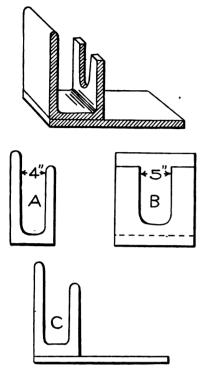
TOOL FOR BENDING ARMS UNDER THE STEAM HAMMER.
